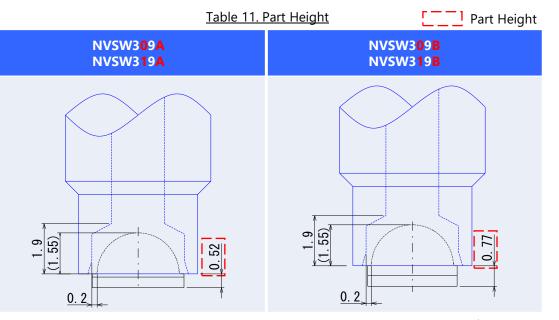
Cross-sectional view of a nozzle when transporting a LED to a PCB
